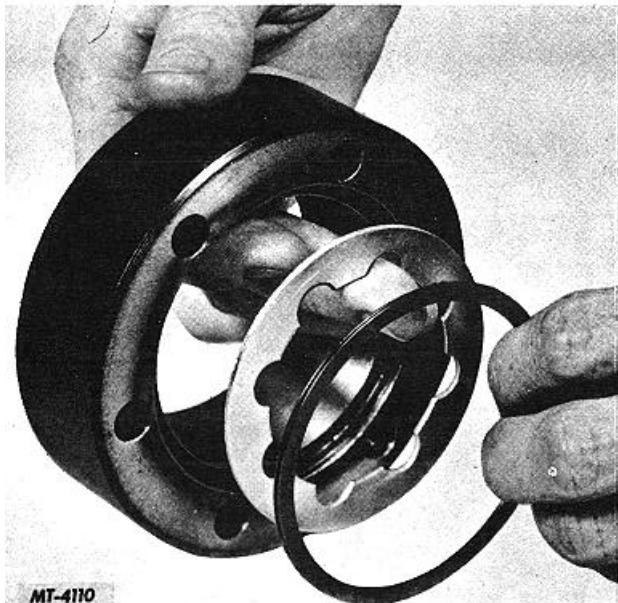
Removing Spirolox Lock Ring and Thrust Washer
